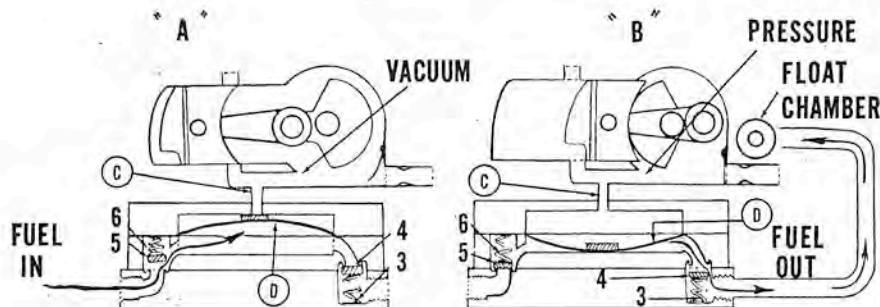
Schematic view of the crankcase operated, diaphragm type fuel pump. Pressure and vacuum pulsations from crankcase pass through connection (C) to rear of diaphragm (D) which induces pumping action on fuel line as shown.
